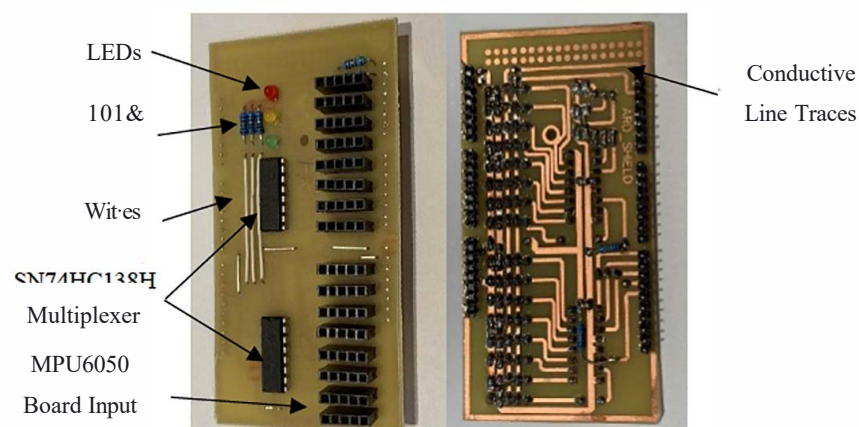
Design of PCB Board: Top View (Left) & Bottom View (Right)
